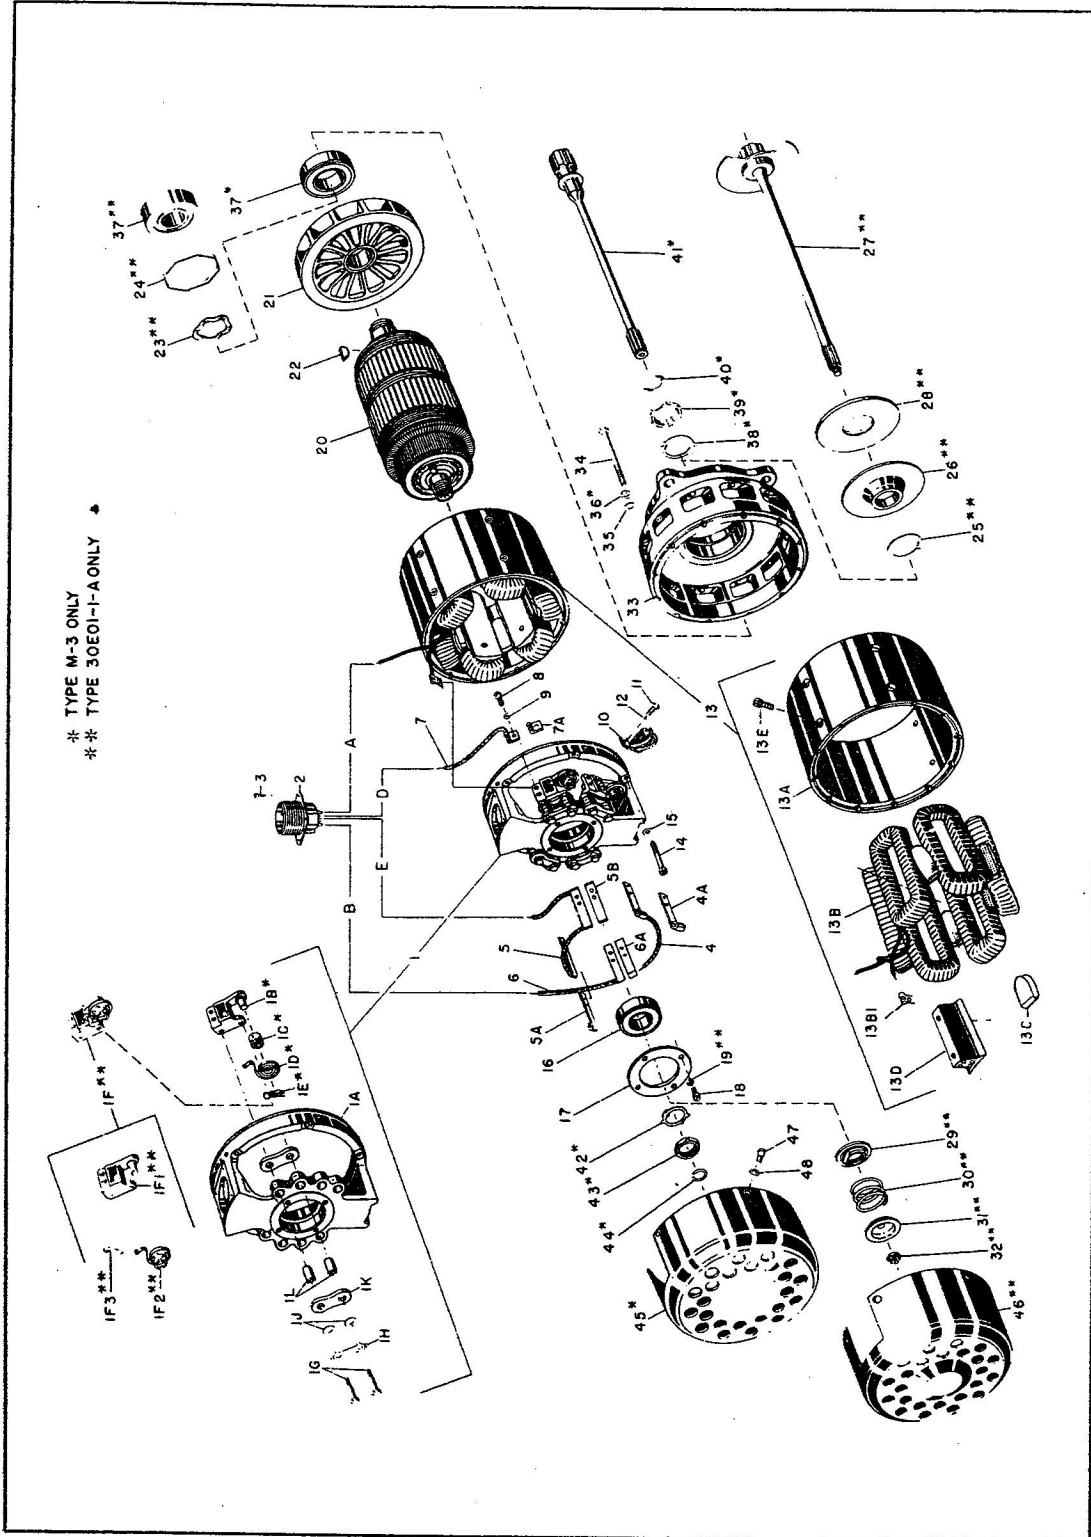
Exploded View Drawing, Types M-3 and 30E01-1-A D-C Generators
